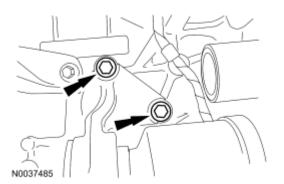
Locating RH Halfshaft Carrier Bearing Bracket Bolts Courtesy of FORD MOTOR CO.
